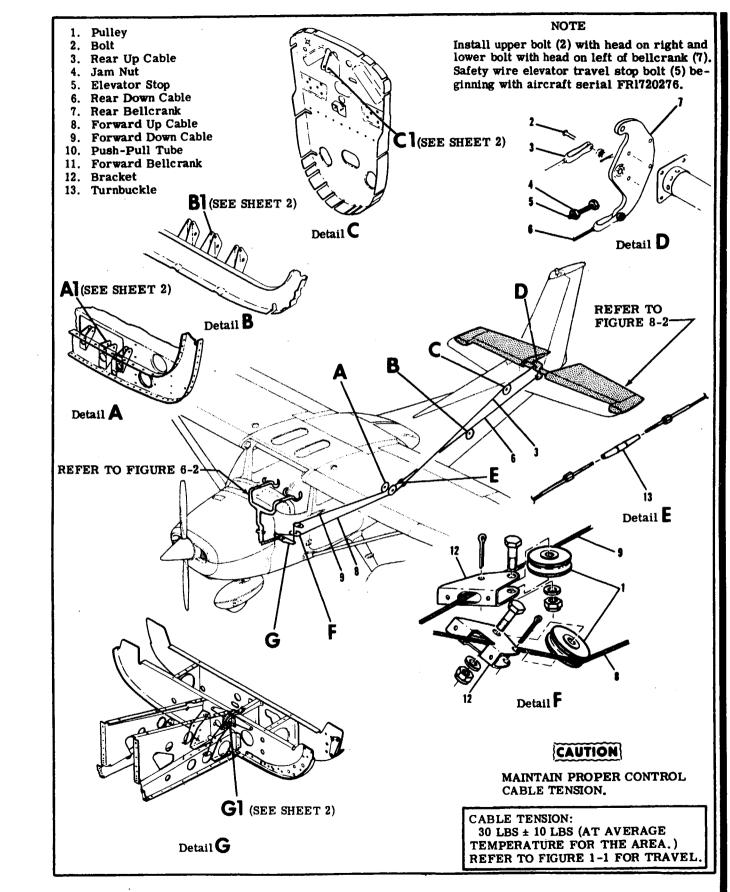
Elevator Control System (Sheet 1 of 2)
